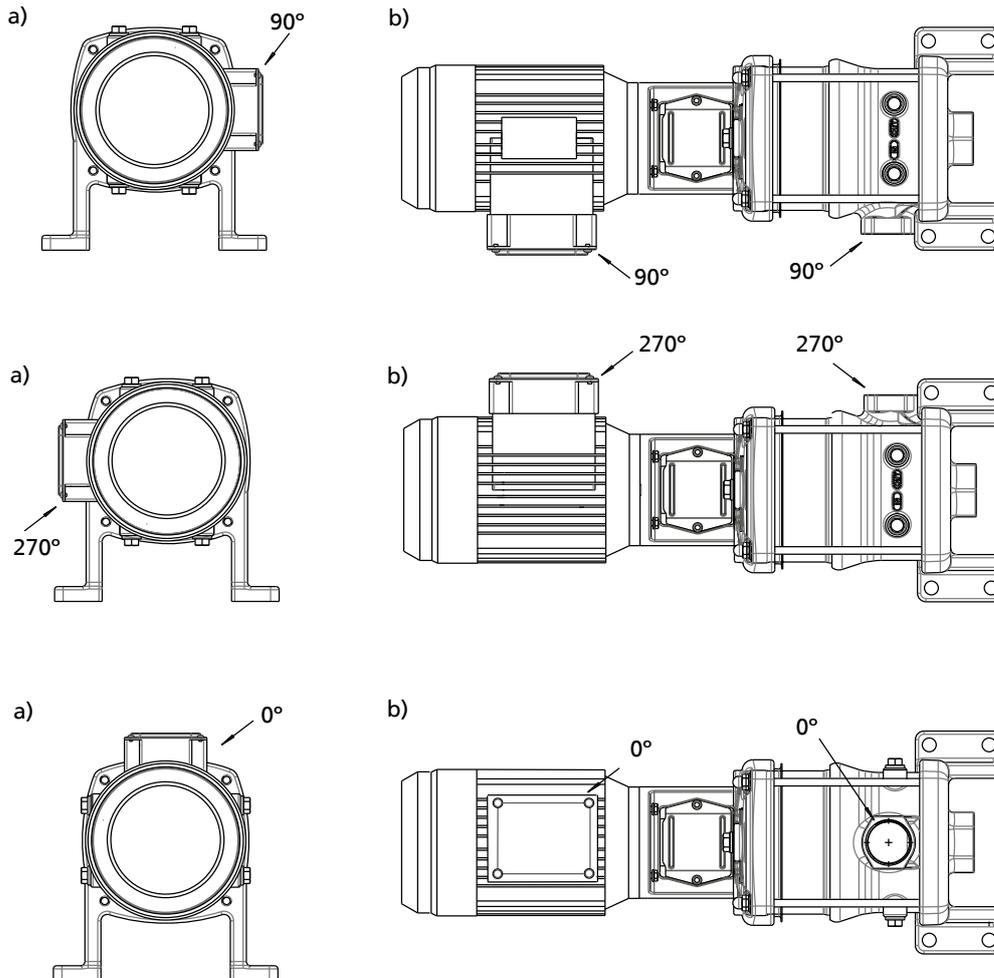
Optional installation types for terminal box position = position discharge side connection a) Side view (seen from the motor) b) Top view
